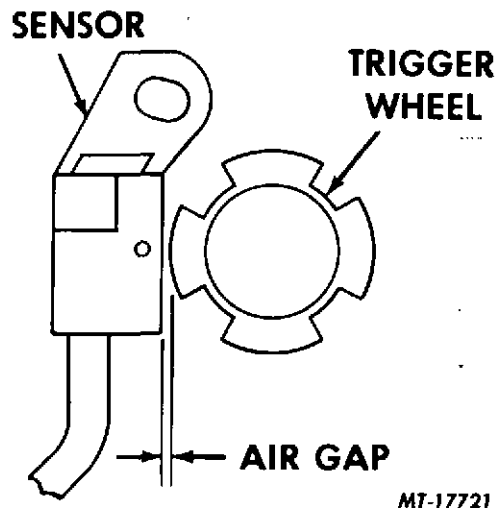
Trigger Wheel-to-Sensor Air Gap
